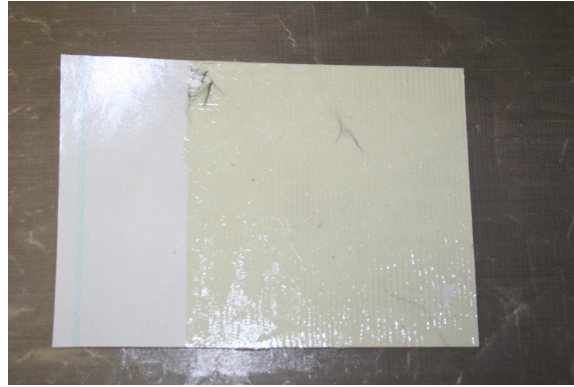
Resin Paper Cut to Size for Shear Specimen Ply Debulking
